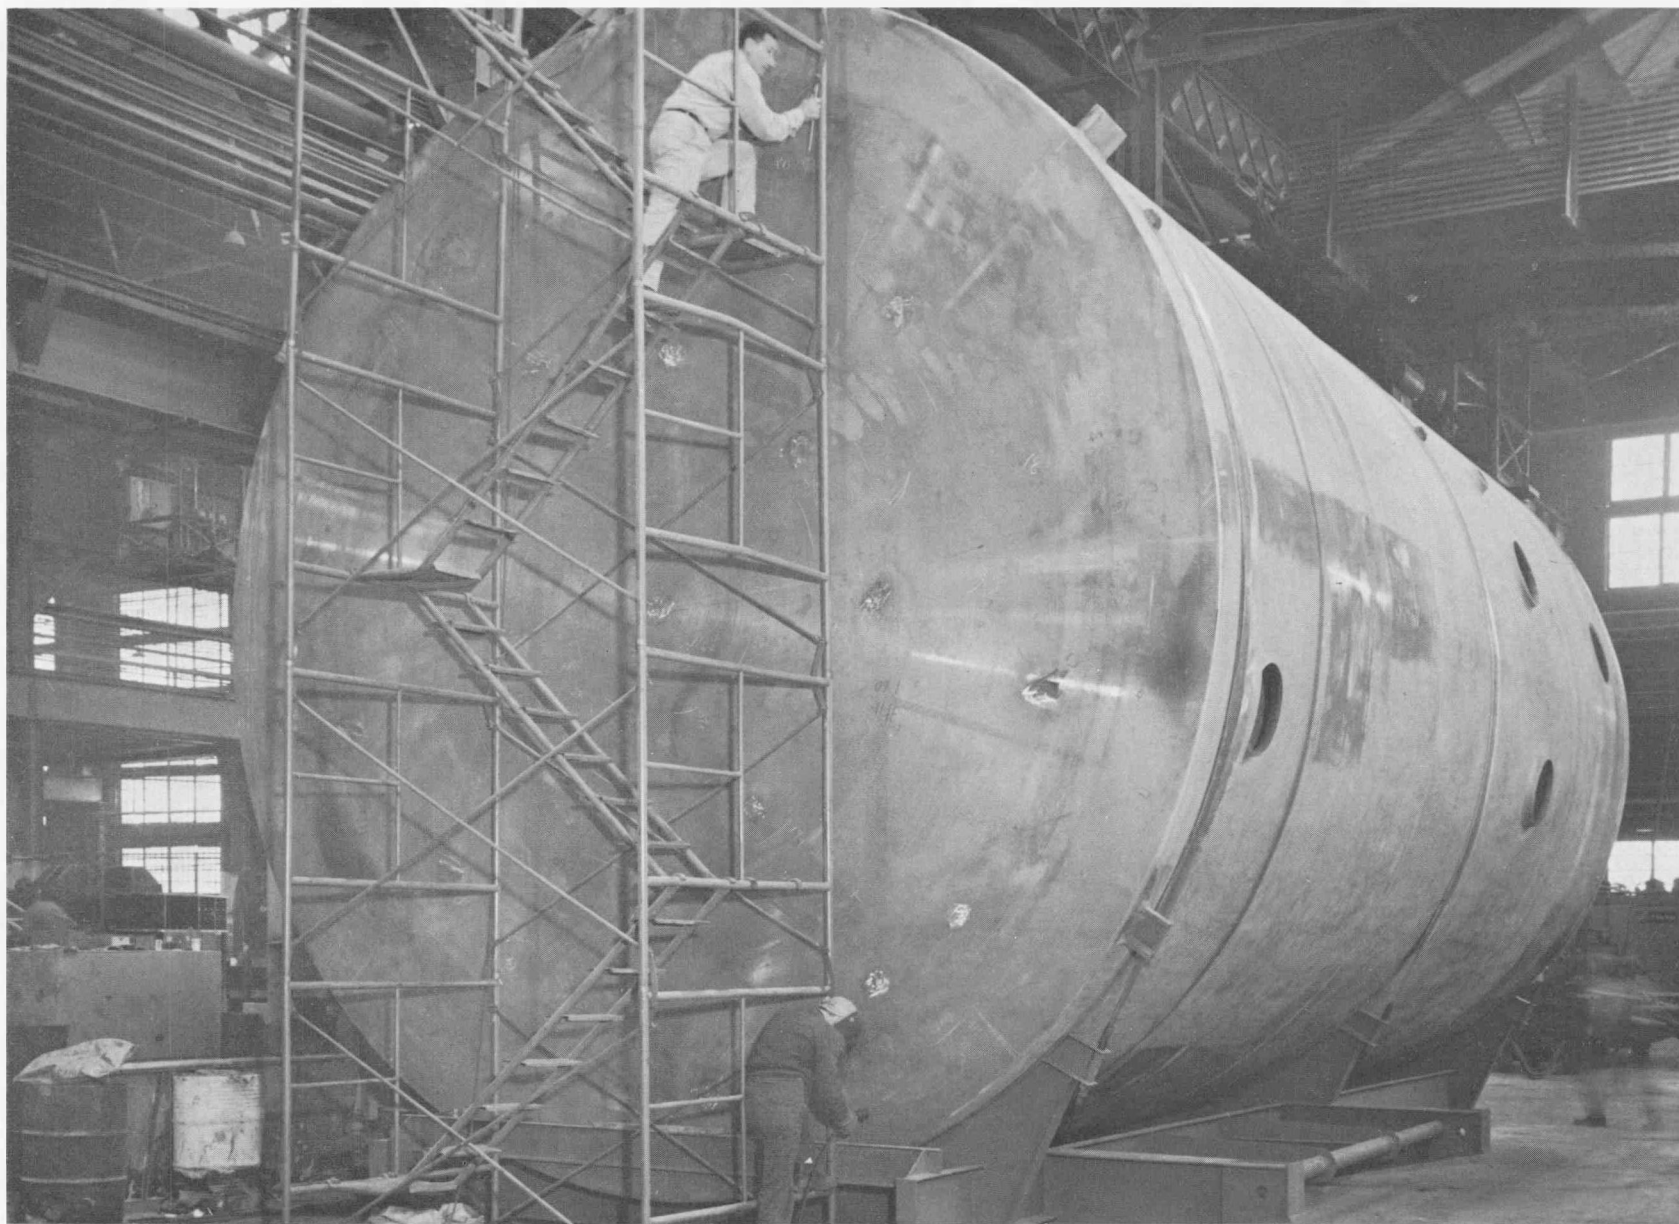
Containment Vessel (View from bottom showing installation of vessel on shipping skid. Vessel is 20 ft 9 in. OD and 35 ft 4-1/2 in. high.)
